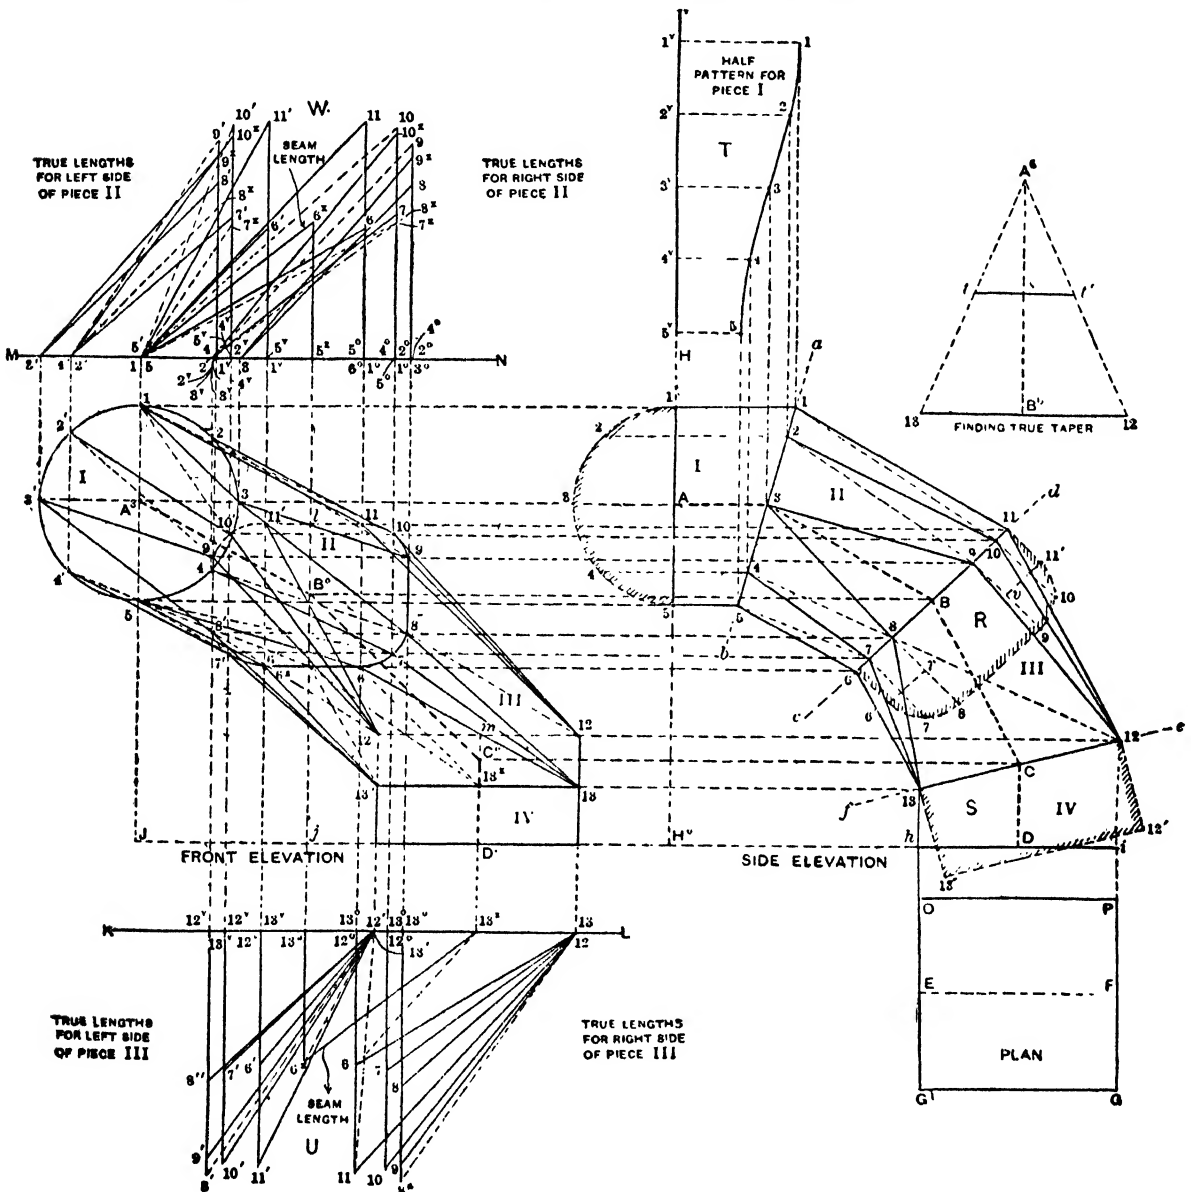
Elevations, Plan, Diagram of Triangles, Pattern and True Taper
